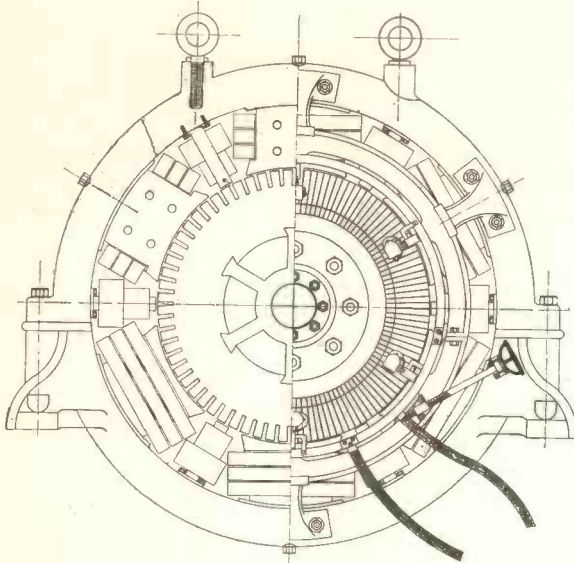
THE GENERAL APPEARANCE AND METHOD OF ASSEMBLY OF A LARGE ALTERNATOR.
